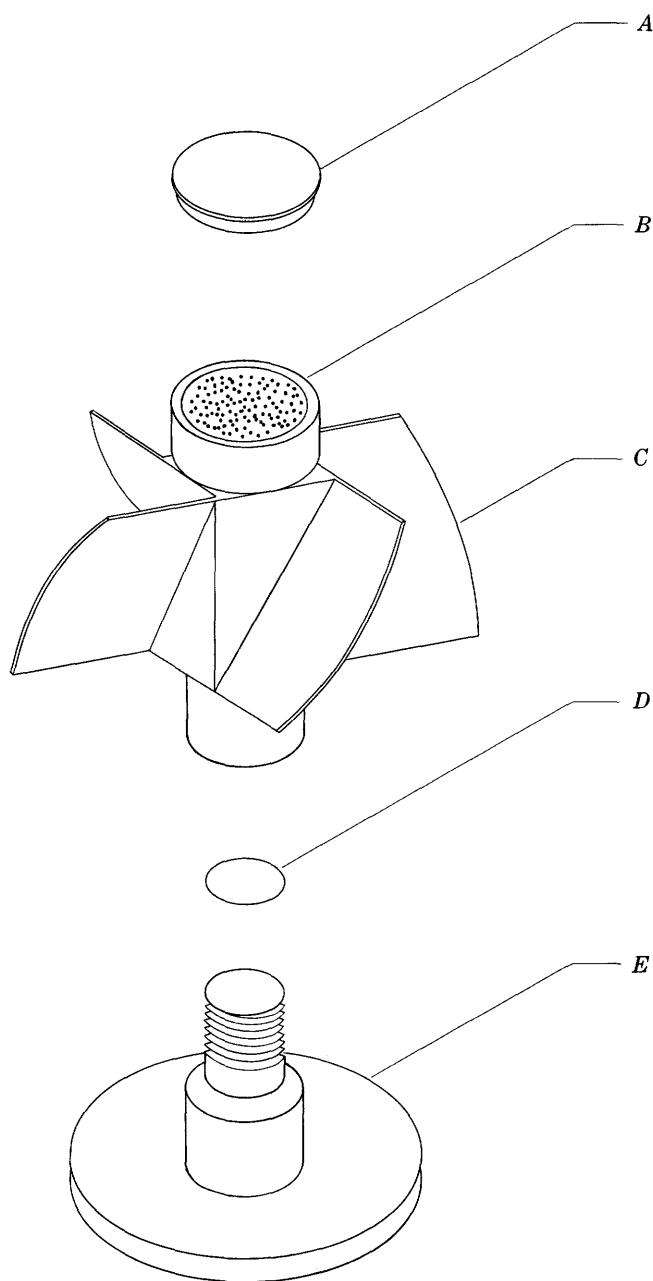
Sample holder and loading pedestal. A, Teflon sealing plug; B, powdered sample; C, sample holder-impeller body; D, gold foil seal; E, aluminum loading pedestal.
